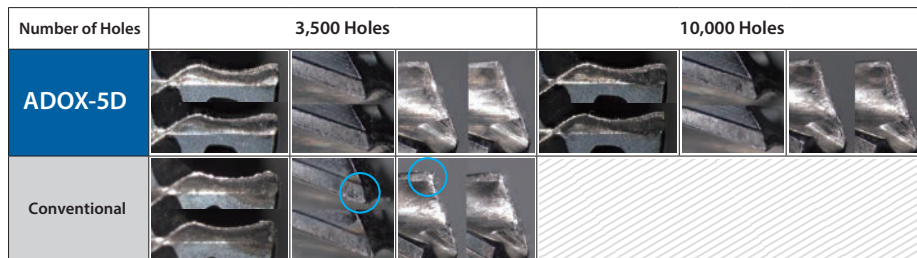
Long tool life achieved through sufficient coolant output at low pressure.
